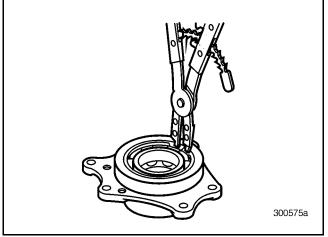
Removing Snap Ring from Rear Mainshaft Bearing Cover
